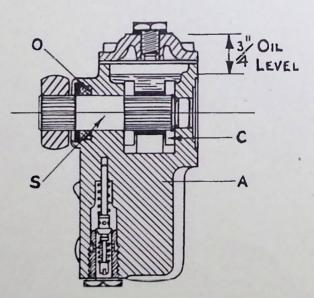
Section View through Spindle and Valve. Also showing Fluid Level.
